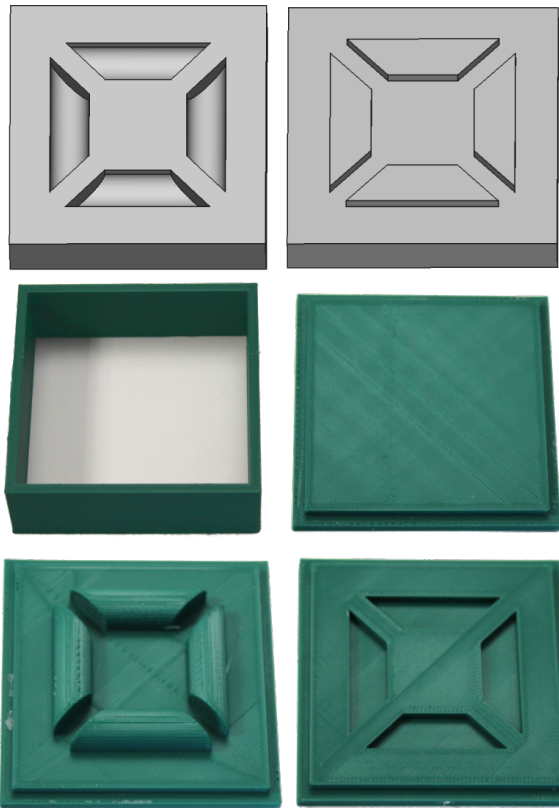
3D-printed parts that assemble to a mold in which the individual silicone pieces making up the sensor, depicted in the top, can be casted. The parts are a mold-wall, a mold-cap, a cavity cap and a cork cap. The second mold-wall, which has the same contour but a different height, is omitted for brevity in this figure.
